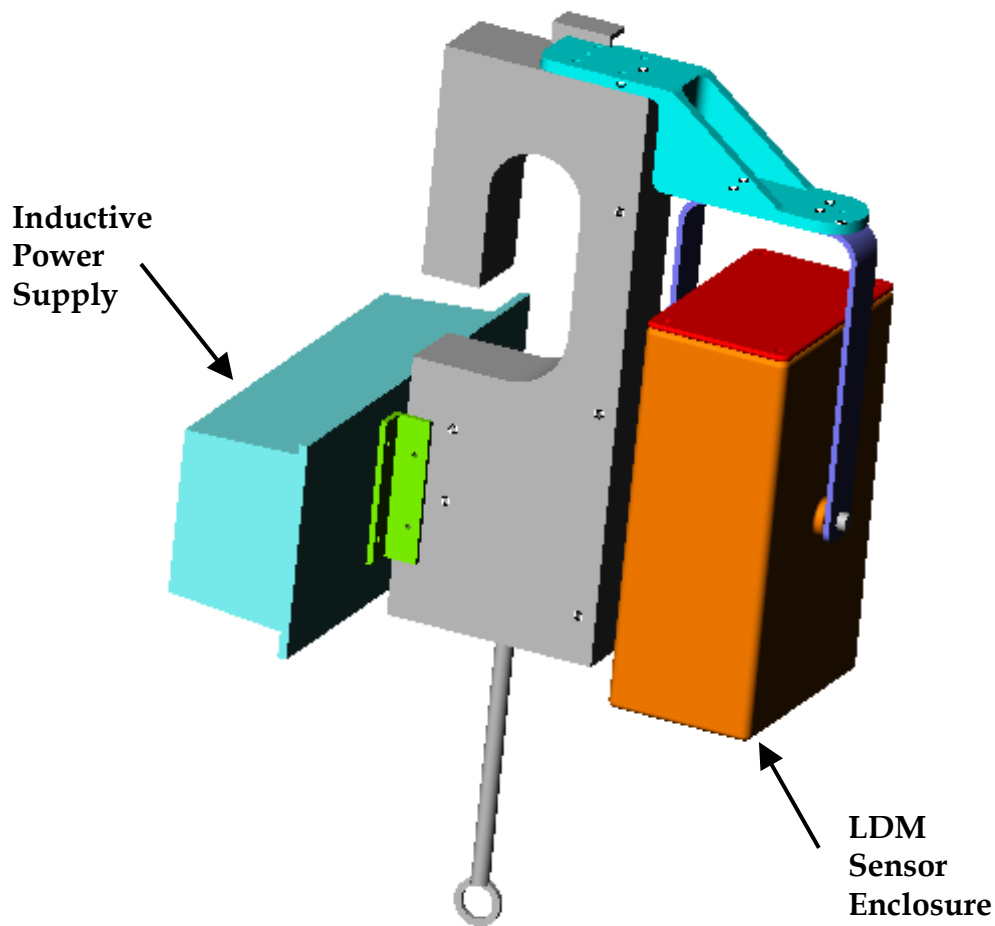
Conceptual Design of LDM Sensor Housed Inside a Custom Enclosure Mounted to a Clamp
